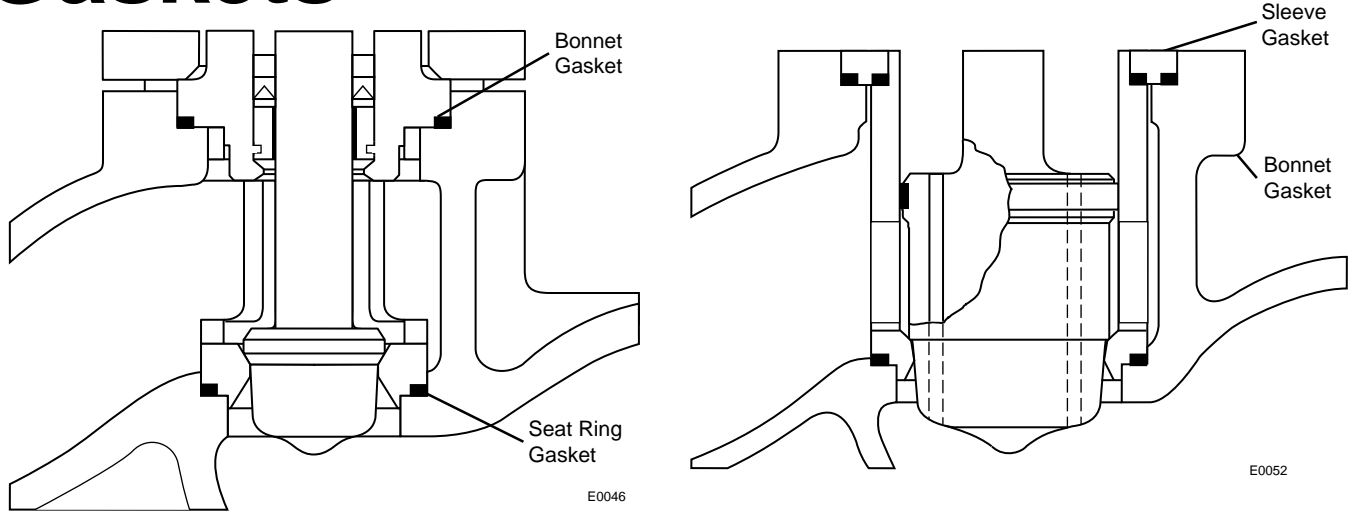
Bonnet, Seat Ring and Sleeve Gaskets, Unbalanced and Balanced Designs
